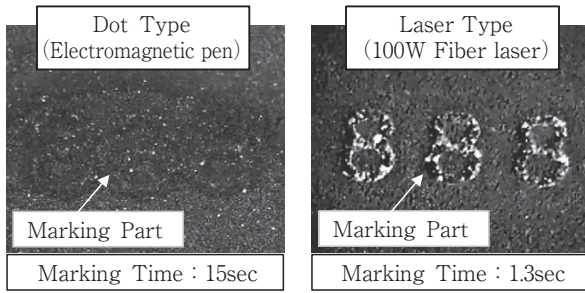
Pictures that marked sand mold with a dot type and a laser type.
